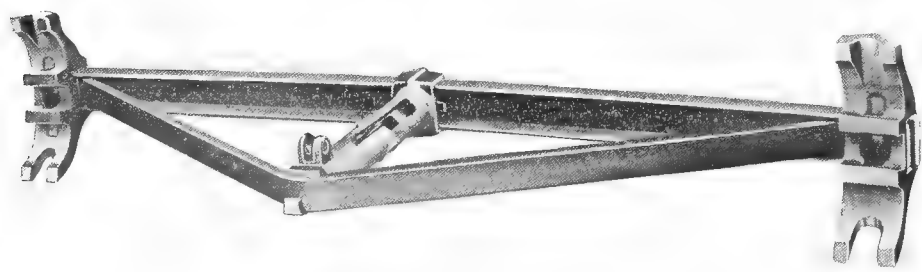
Huntoon Standard Freight Brake Beam. Joliet Railway Supply Company.
